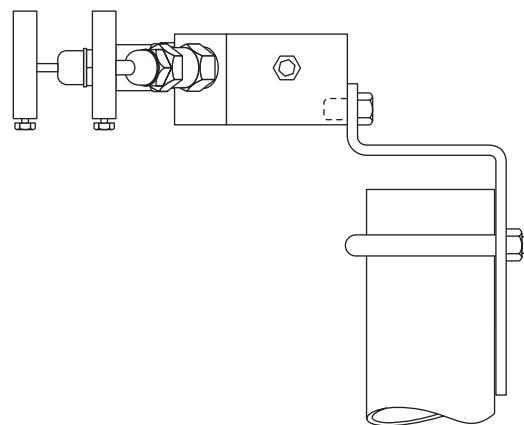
Typical Mounting of MB3 Manifold with -AM Bracket
